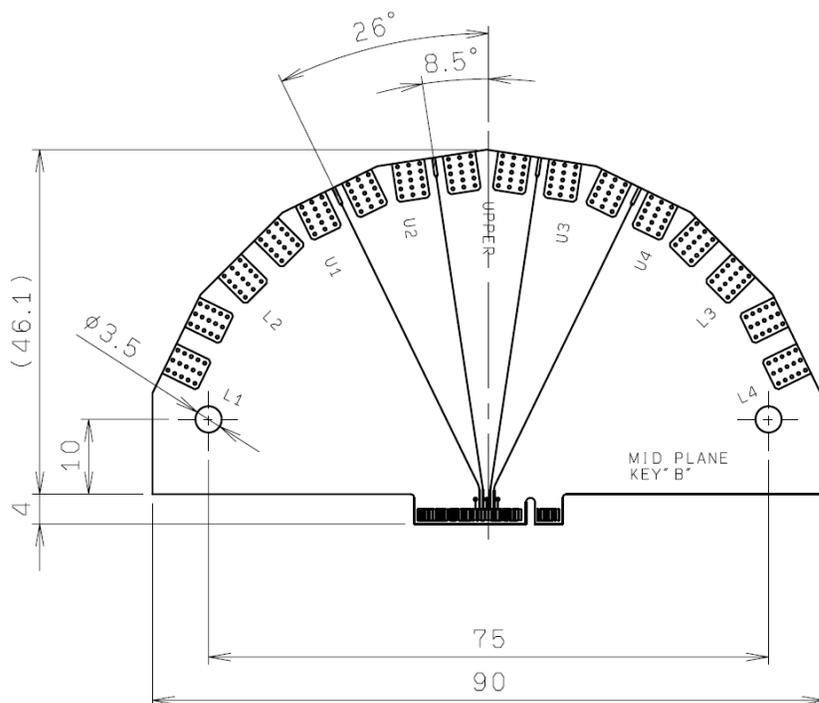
Mid-mount Add-in Card Test Fixture PCB Layout
